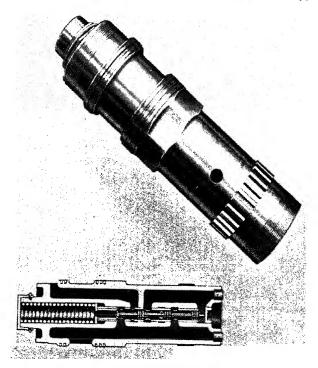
Hydromatic Airscrew. Distributor VALVE ASSEMBLY
